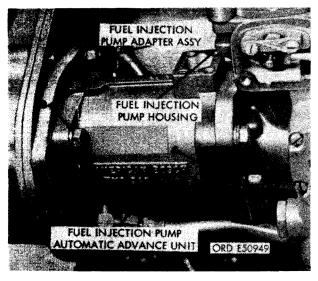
DISCONNECTING OR CON-NECTING FUEL INJECTION PUMP AT FUEL INJECTION PUMP ADAPTER UNIT.
